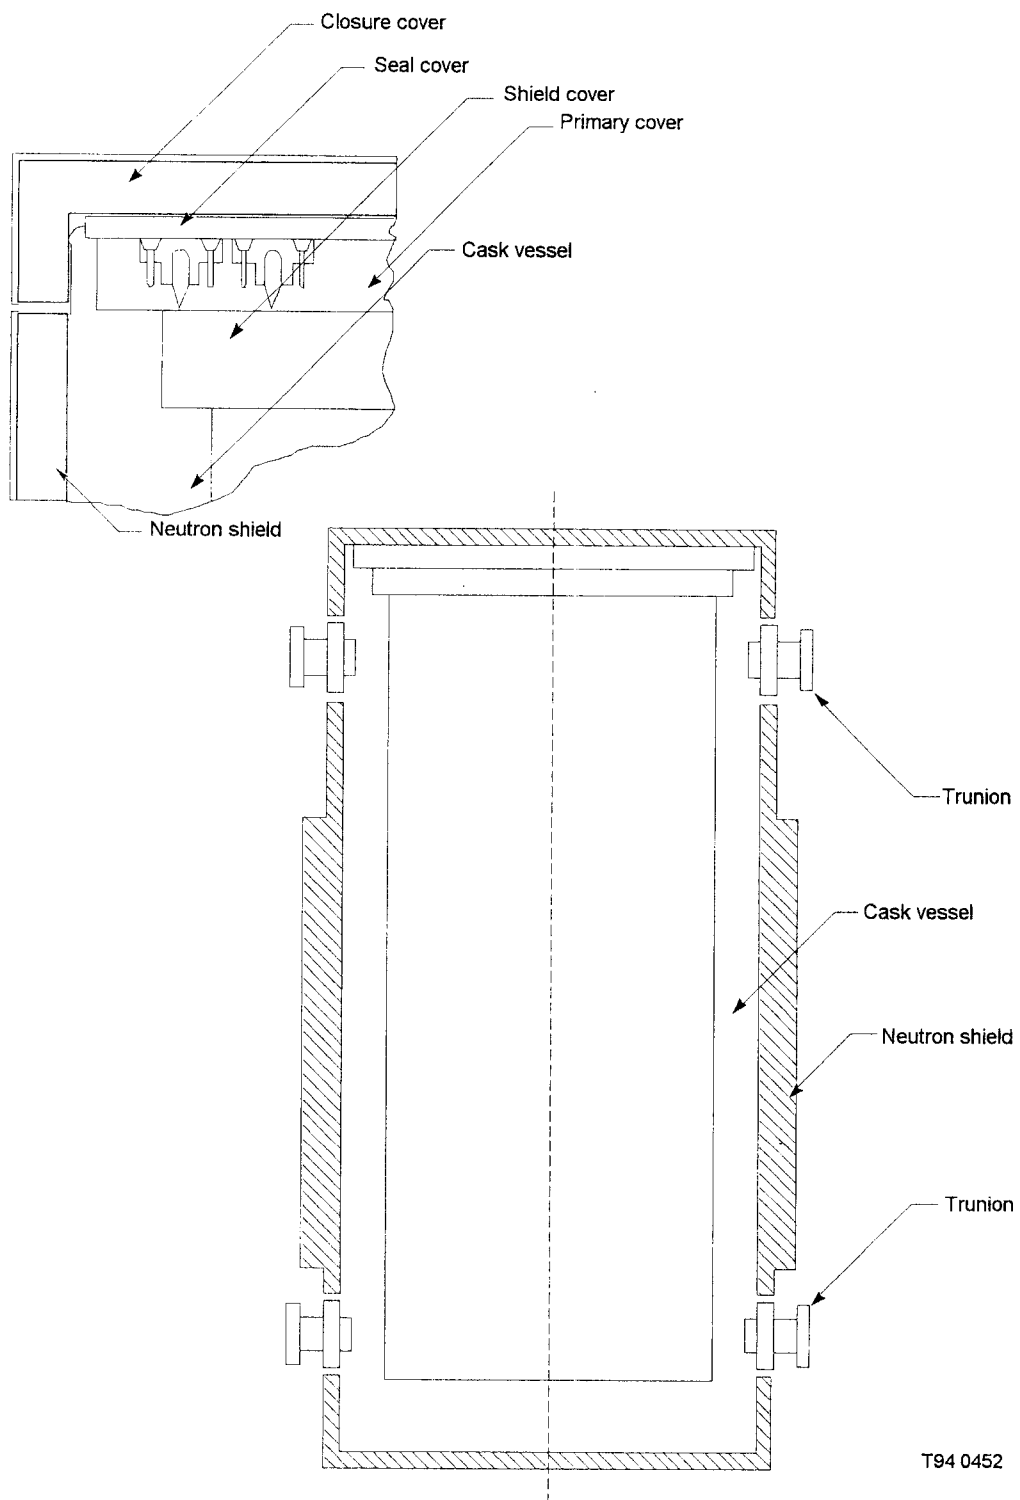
Westinghouse MC-10 cask vessel assembly.
